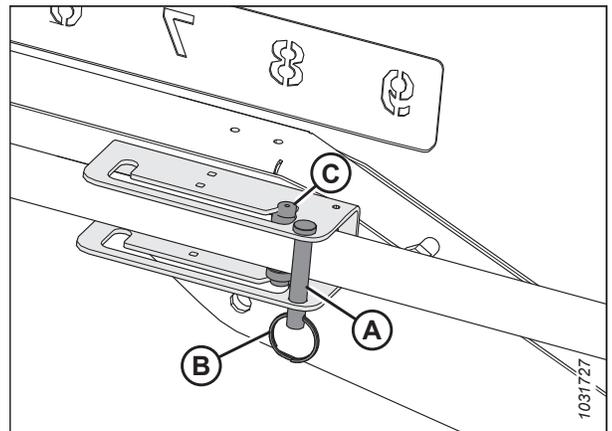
Fore-Aft Cylinder Adjustment Type 2 – Aft Position
